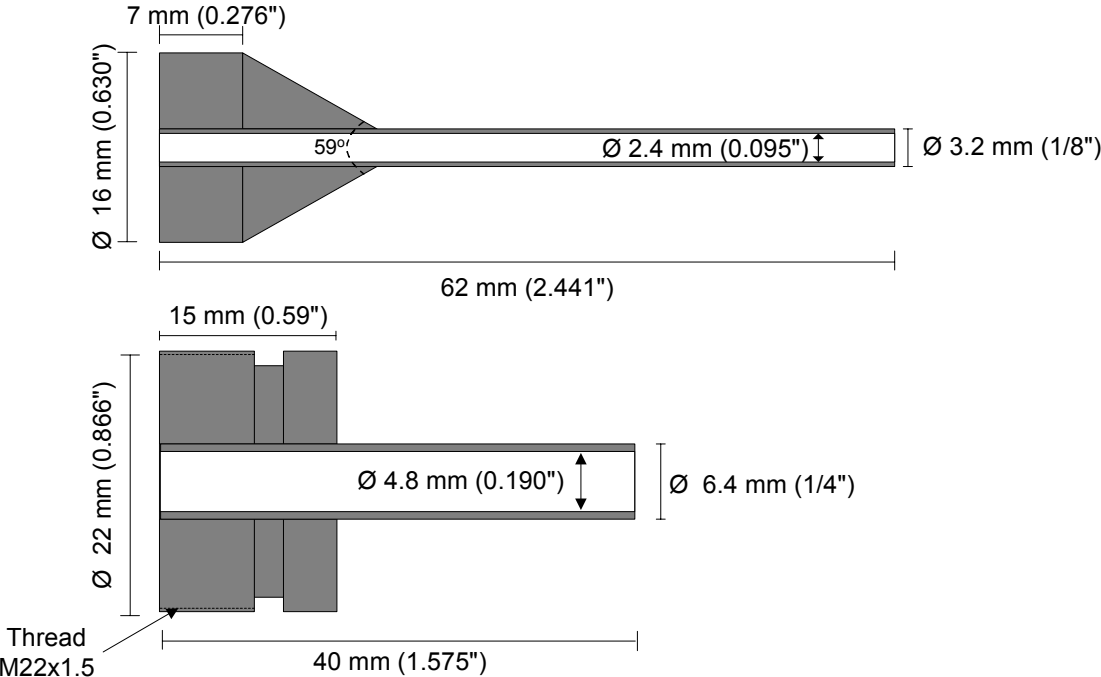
Design drawing of fuel (top) and oxygen (bottom) nozzles (SS316) used in hydrothermal flame rock spallation experiments.
